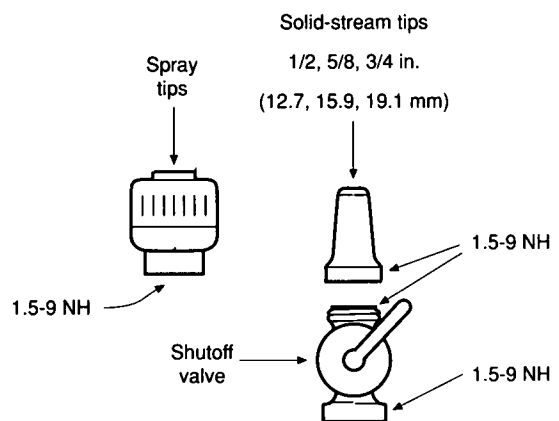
Nozzle assembly for $1\frac{1}{2}$ -in. (38-mm) hose.
